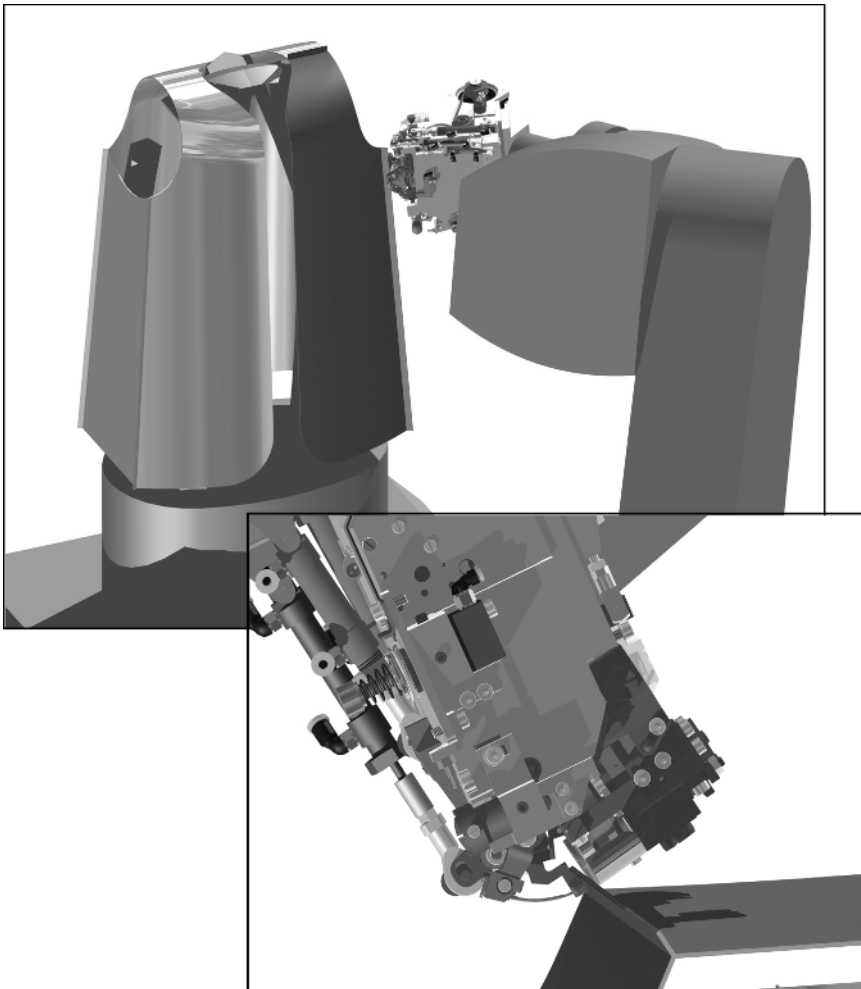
(top left): Basic principle: Robotic 3D sewing technology/Philipp Moll GmbH & Co KG/, (bottom right): Spherically positioned fabric is assembled by robot guided sewing machine/ Philipp Moll GmbH & Co KG/
